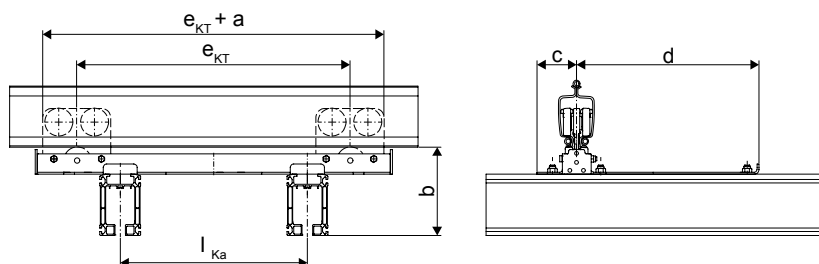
A18/A22/A28 double girder crane end carriage, KBK II-L, II, II-H track section
